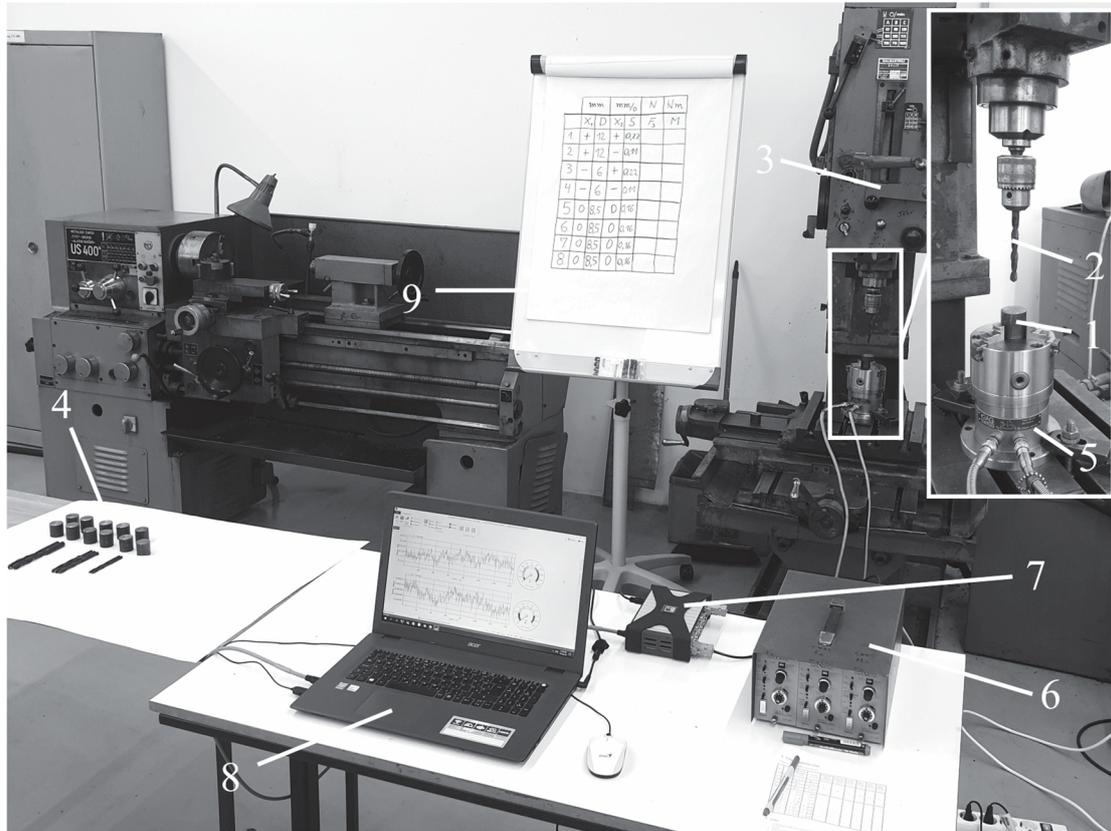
Research site: 1 – workpiece, 2 – cutting tool (twist drill), 3 – machine (drill press BD-40), 4 – workpieces and tools for experimental points, 5 – sensor (piezo-electric dynamometer), 6 – charge amplifier, 7 – universal amplifier, 8 – a computer with acquisition software, 9 – experiment matrix plan
